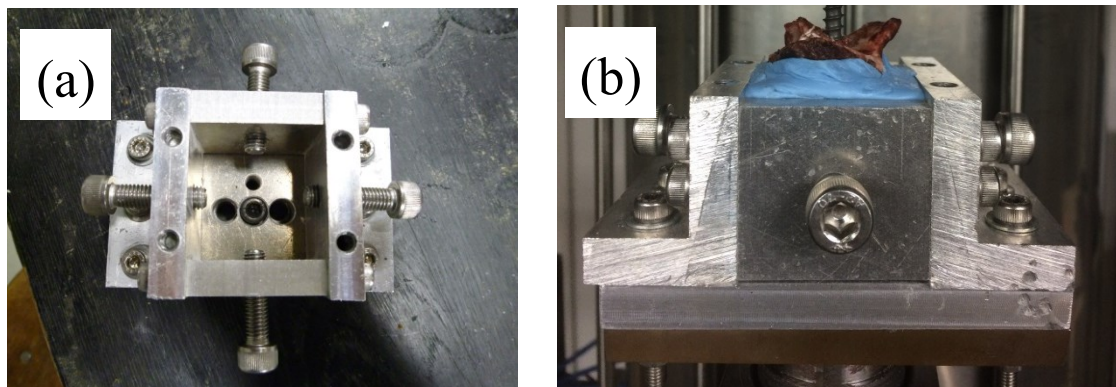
Appearance of Jig (a) inside mechanism to fixed specimen, (b) side view
